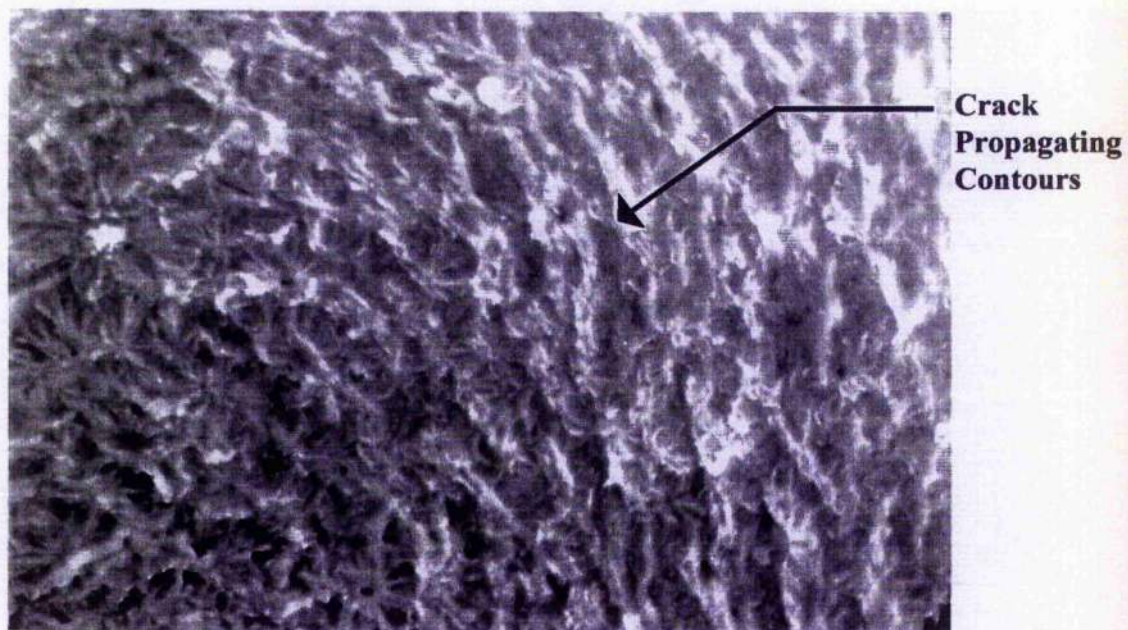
Fracture surface of F241 tested at 60 °C (20X)
